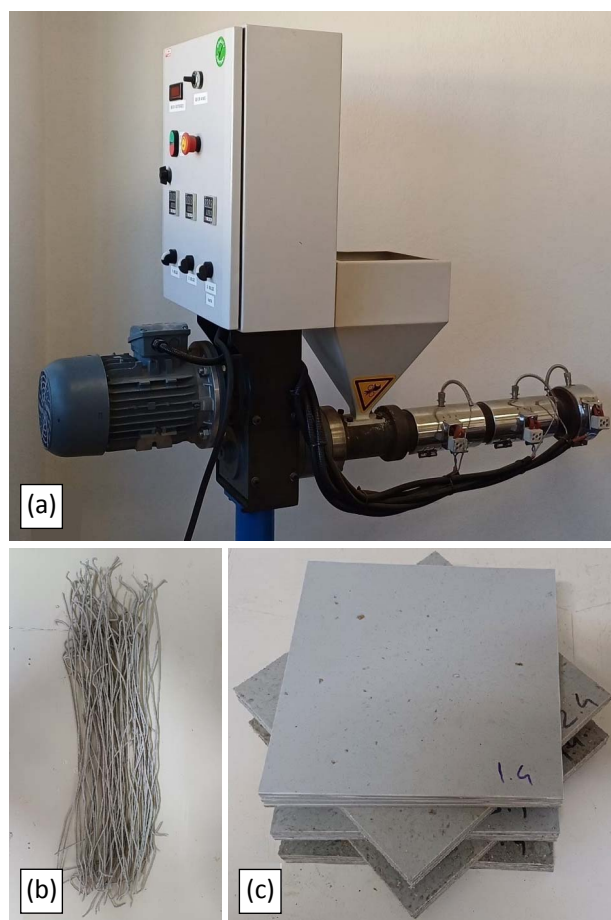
Preparation of composites: (a) single screw extruder, (b) filaments and (c) composite sheets
